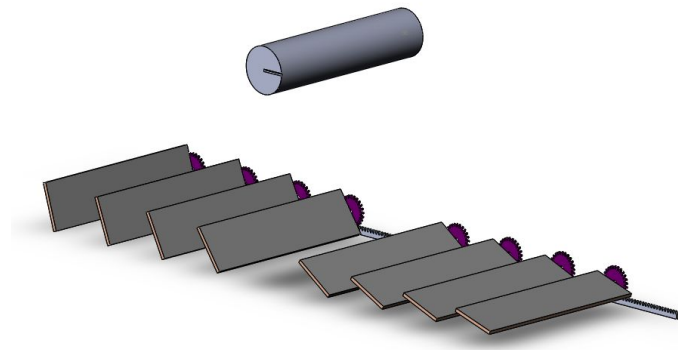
SolidWorks Design for the strips (Triometric View) Sunrise Position
